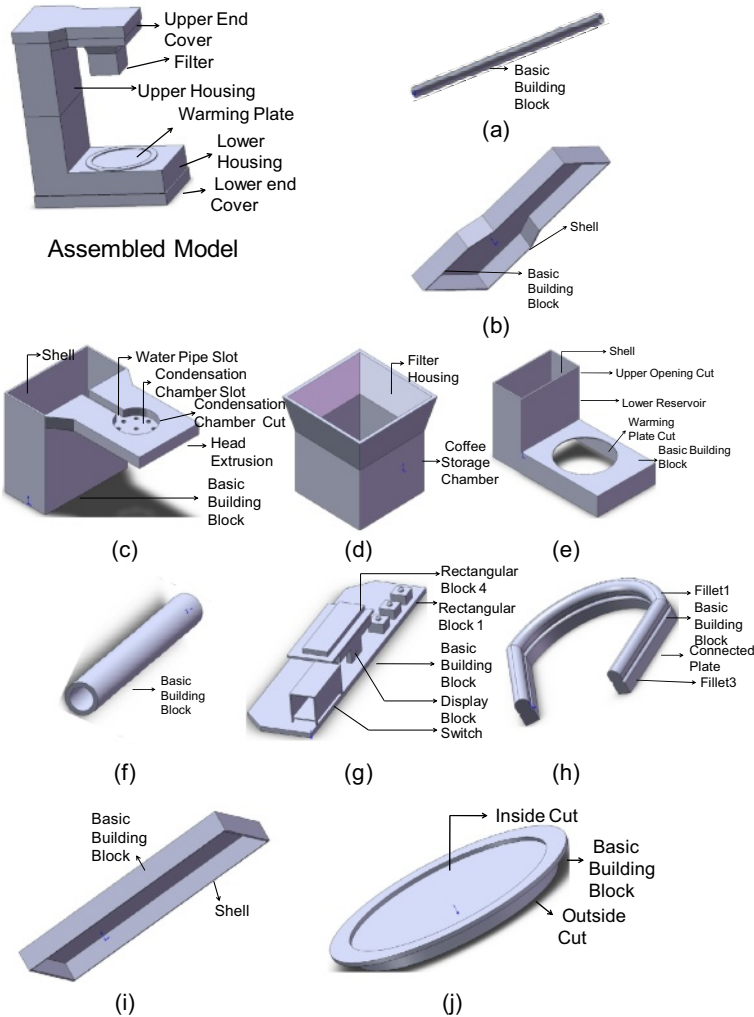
Coffeemaker 2 assembly and components: condensing tube (a), upper end cover (b), upper housing (c), filter (d), lower housing (e), heating tube (f), electric circuit (g), heater (h), lower end cover (i), and warming plate (j)
